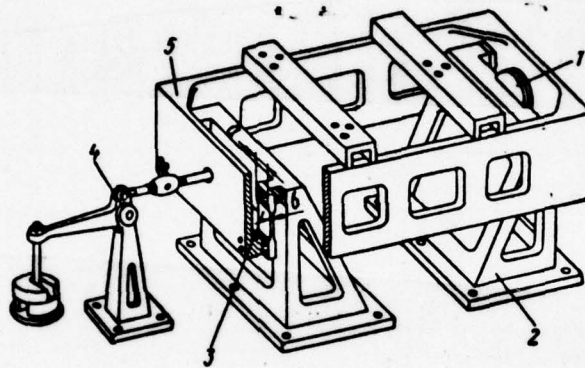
Machine tool with suspension platform on elastic strips. 1 - dynamometer, 2 - mounting, 3 - elastic strip, 4 - device for calibration, 5 - platform.
